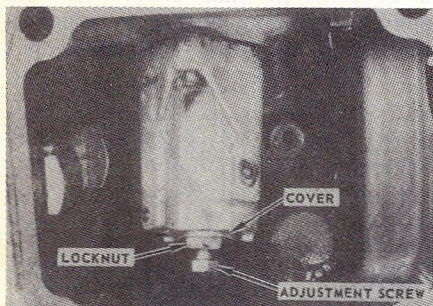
Automatic oil pump output is adjusted by loosening locknut and turning adjustment screw. Adjustment should be made in small increments.
